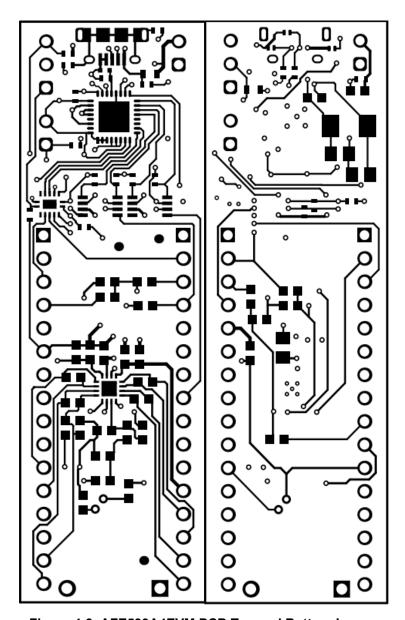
AFE539A4EVM PCB Top and Bottom Layers
